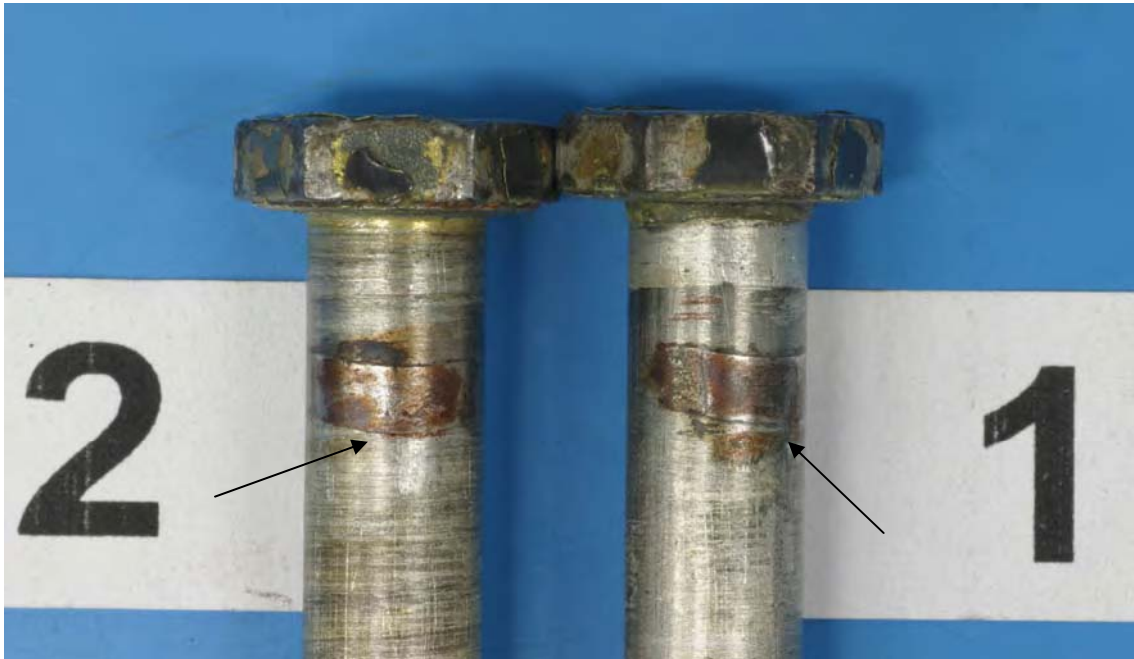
Fretting and wear damage to the bolt shanks, indicating interference with the clutch shaft holes.
